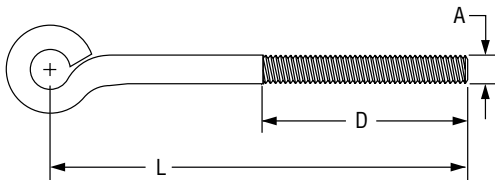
, FIG. 248L: LOADS (LBS) • DIMENSIONS (IN)
